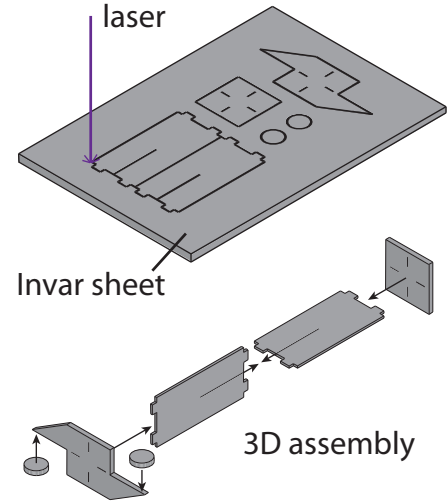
Sensor beam components are machined in 2D with a laser (top) then assembled in three dimensions (bottom). Seams are laser-welded to join the pieces together. Refer to Fig. 2 for relevant dimensions of the final assembly.
